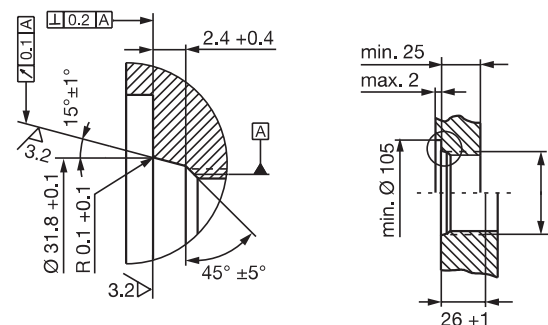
Mounting hole M30x1.5 per ISO 6149 O-ring 27x2.5
